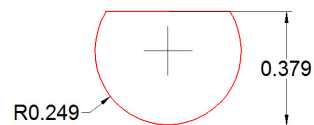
A drawing of a plastic ball with a flat surface after being rubbed. (unit: inch)
